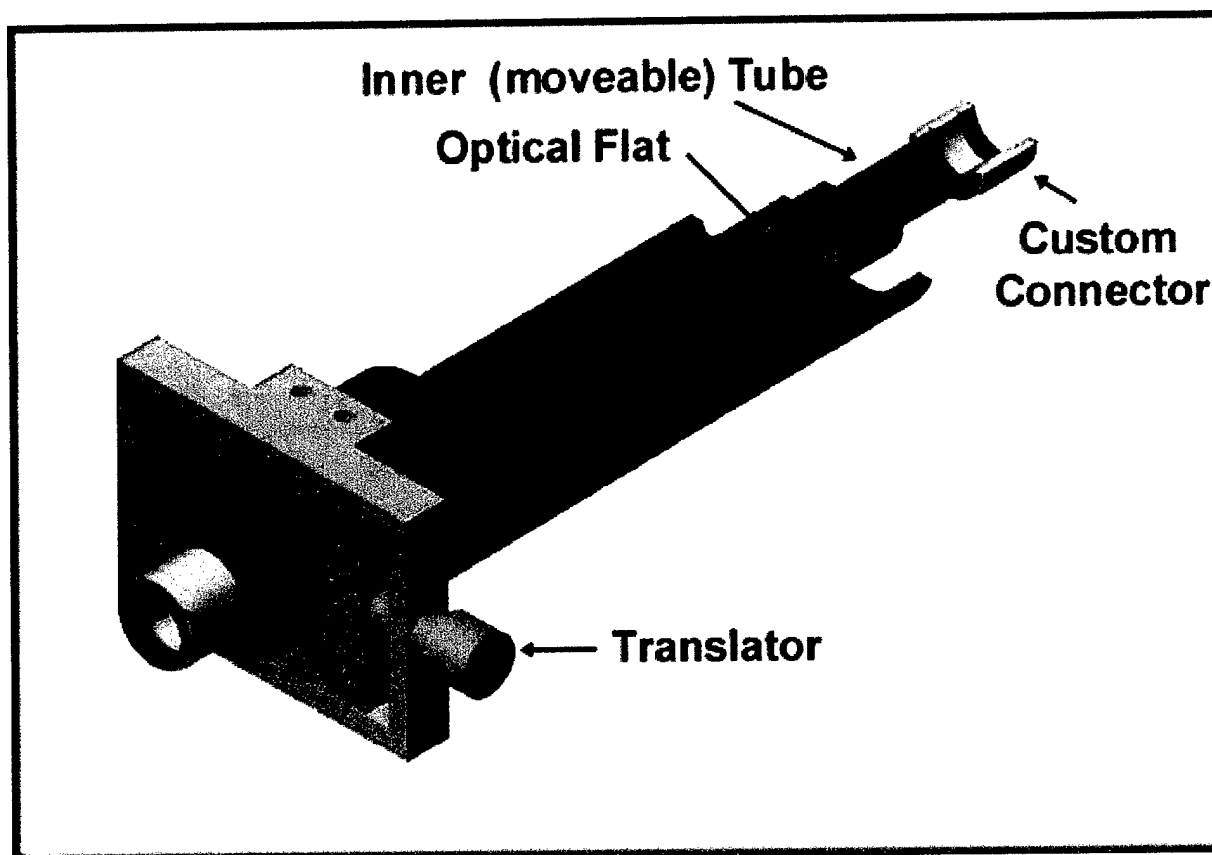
View of Inlet calibration device showing FSSP laser beam shining through optical flats inserted into the inner tube.
